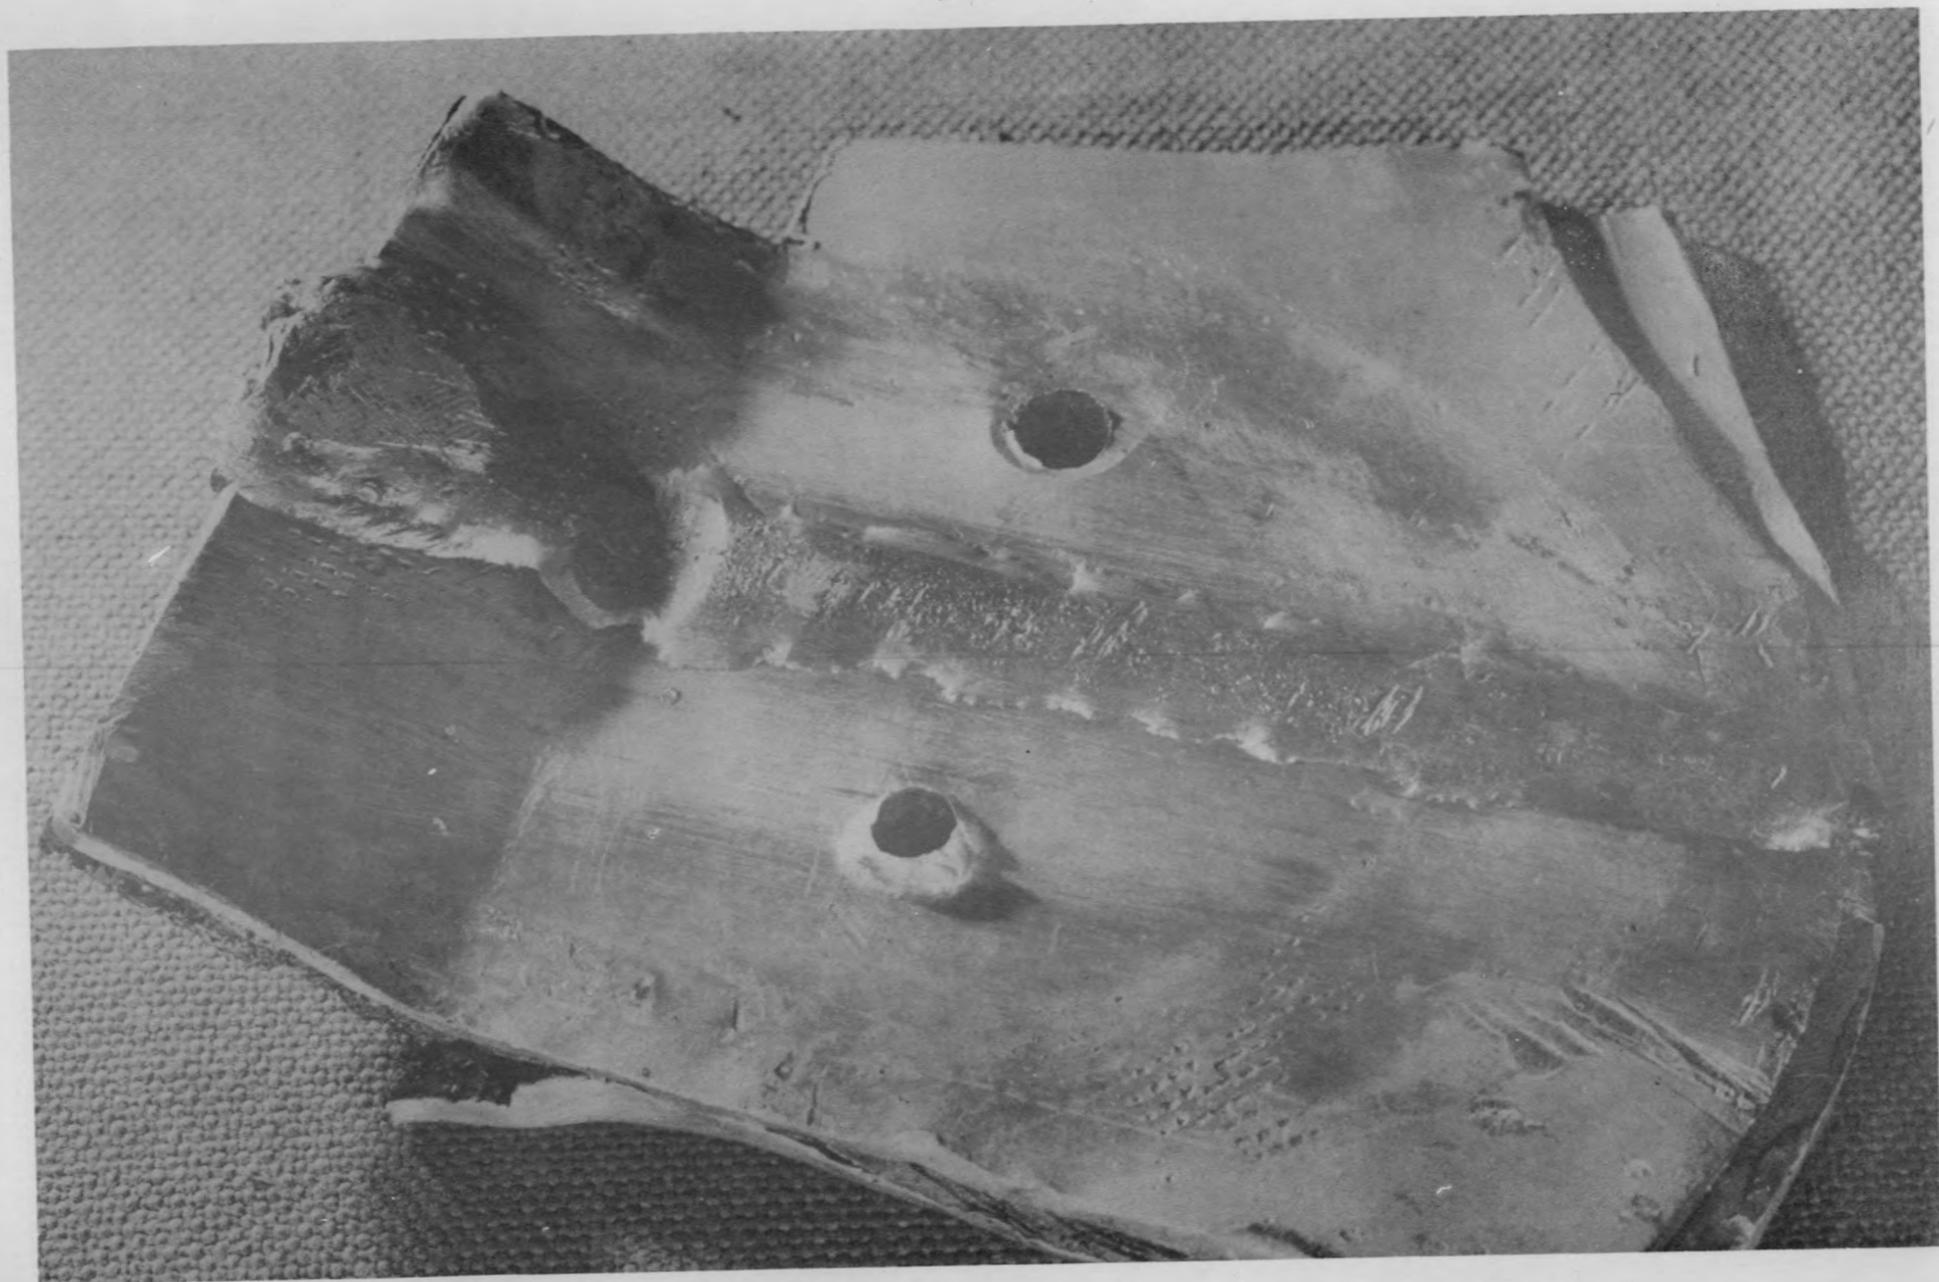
BORAL SAWED, WELDED, PUNCHED, AND DRILLED
